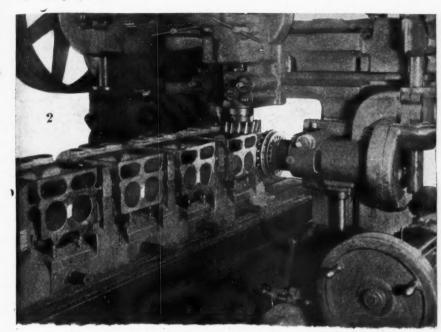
The first operation on the cylinder castings is performed on a four-spindle Ingersoll milling machine. Fig. 3—The burnishing tool is shown here just before it enters the cylinder bore. This operation is performed on a large Pond Radial Drill
